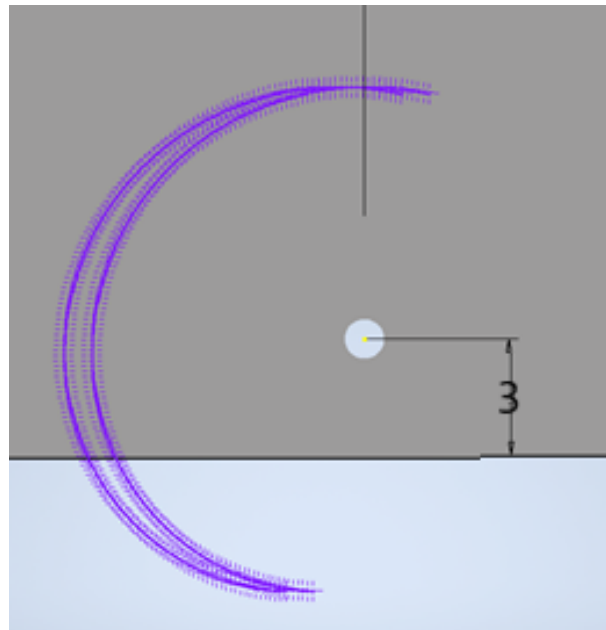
Workpiece positioned to guarantee  $a_e = 13$  mm.
